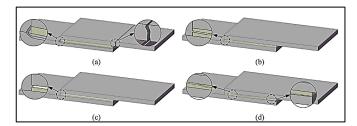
The failure modes of joints involving adhesion and adhesives. (a) Substrate failure (b) cohesive failure (c) debonding or adhesive failure (d) mixed failure [5].
